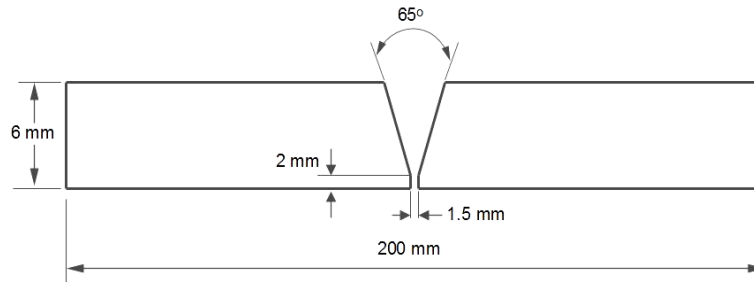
A schematic illustration of the GTAW joints edge preparation.
